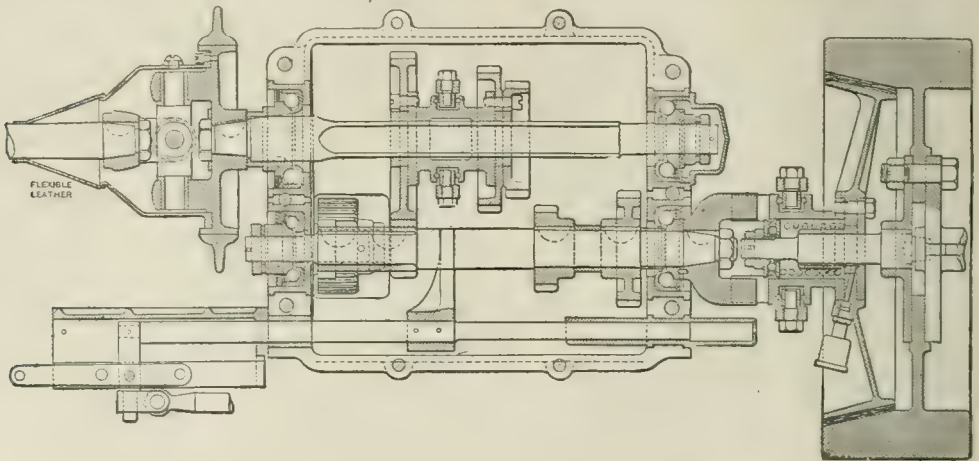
CONE CLUTCH (to the right), SLIDING GEAR MECHANISM AND UNIVERSAL JOINT (to the left) TO BEVEL-GEAR SHAFT.
